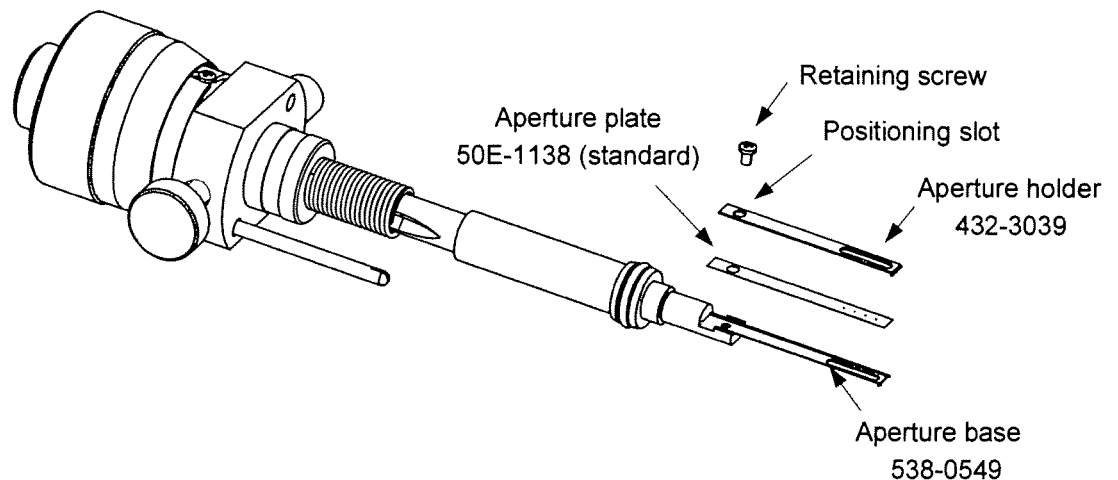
Removing the Objective Lens Movable Aperture Assembly
